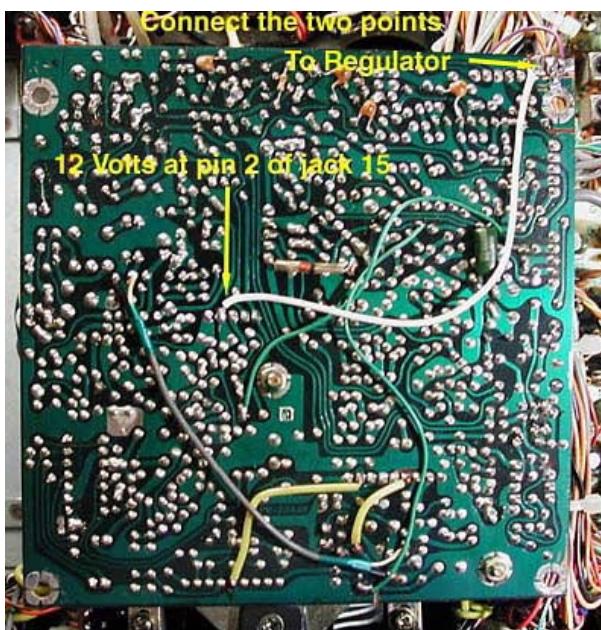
View of the back side of the completed AF Board (PB-2344).
